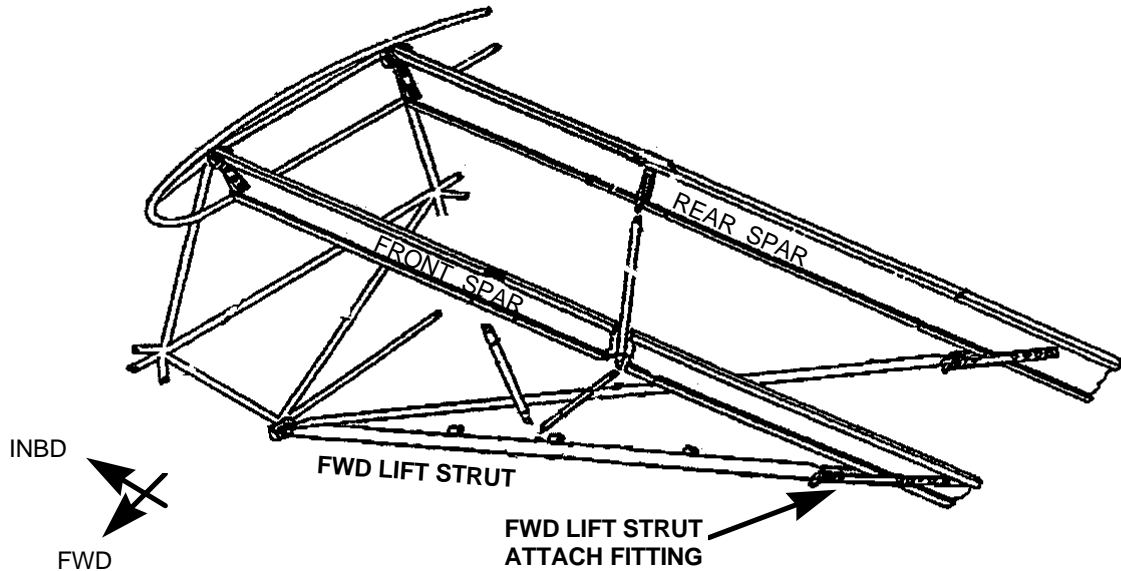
Typical Wing Structure of a High-Wing Piper Airplane
